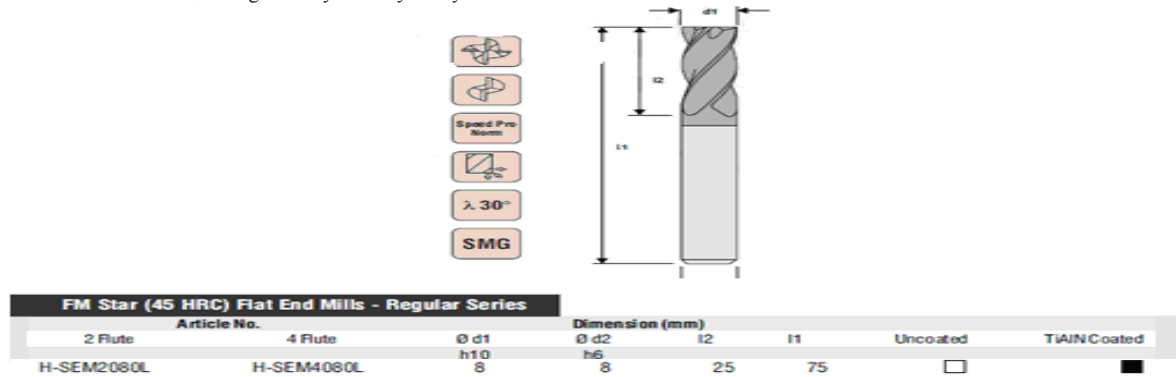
Solid carbide tool (from tool manufacturer's catalogue)
